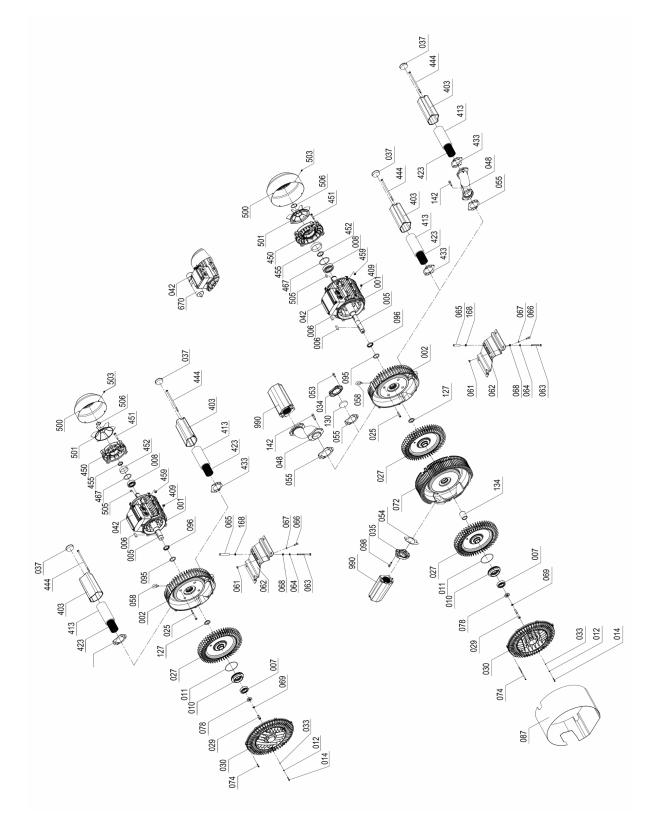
Exploded Drawing of the series -NS / -ND / -NDF
